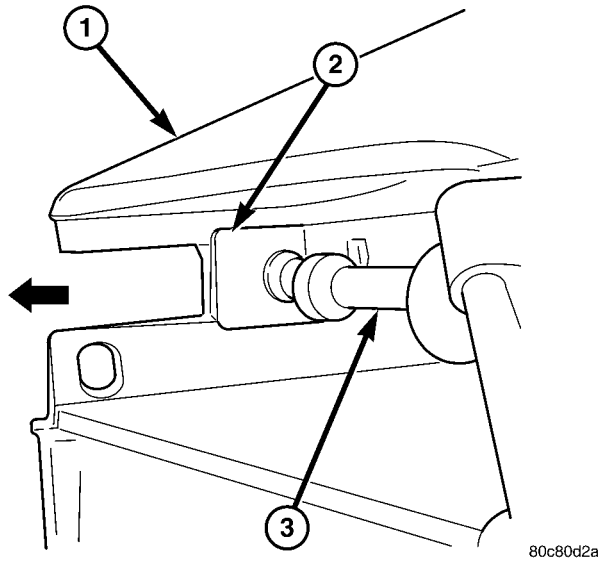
SPEED CONTROL CABLE AT BRACKET
